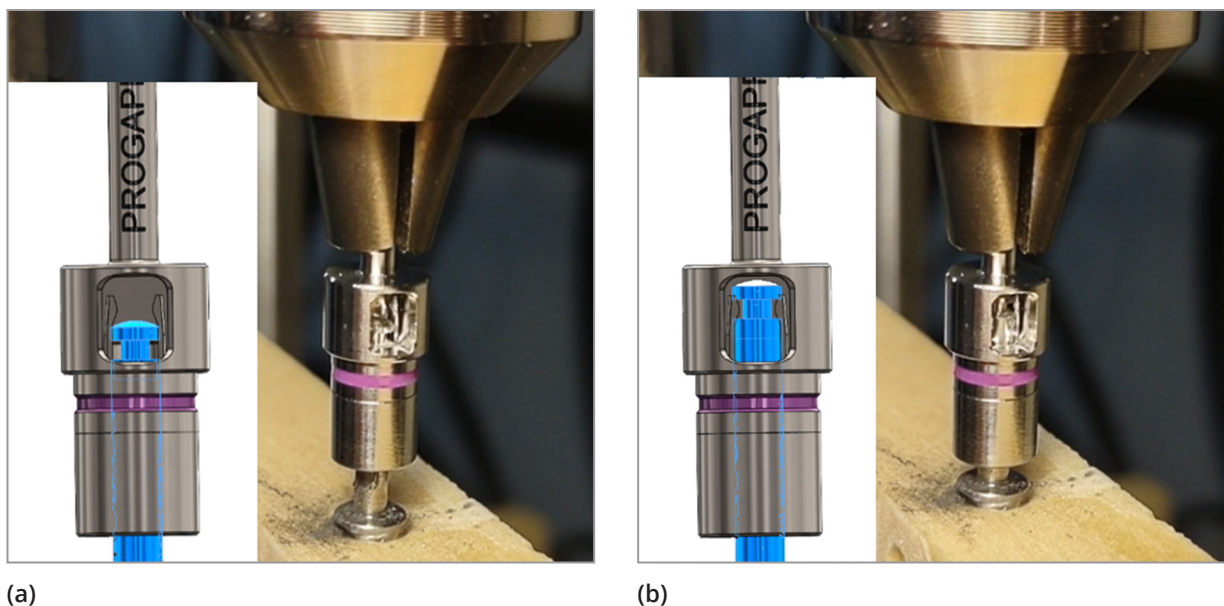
Representative test set up with superimposed CAD models depicting a drill ISO shank (a) disengaged and (b) engaged into the guide adapter.
